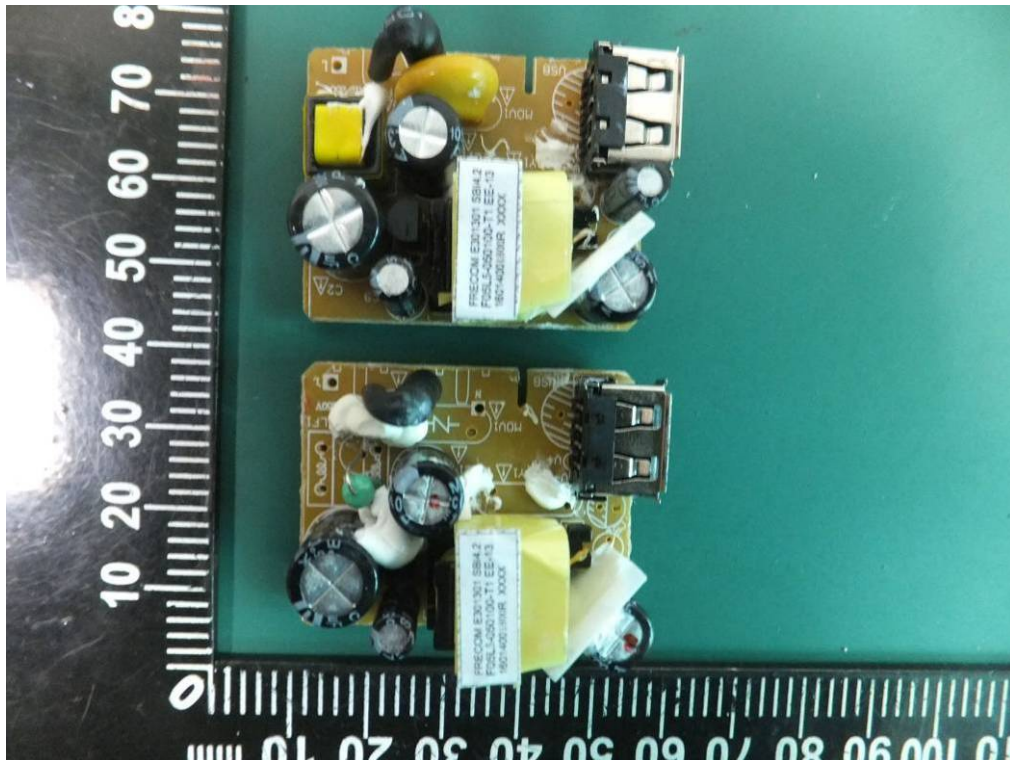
Top view of PCB for F05L5-xxxxyySPAU-U
